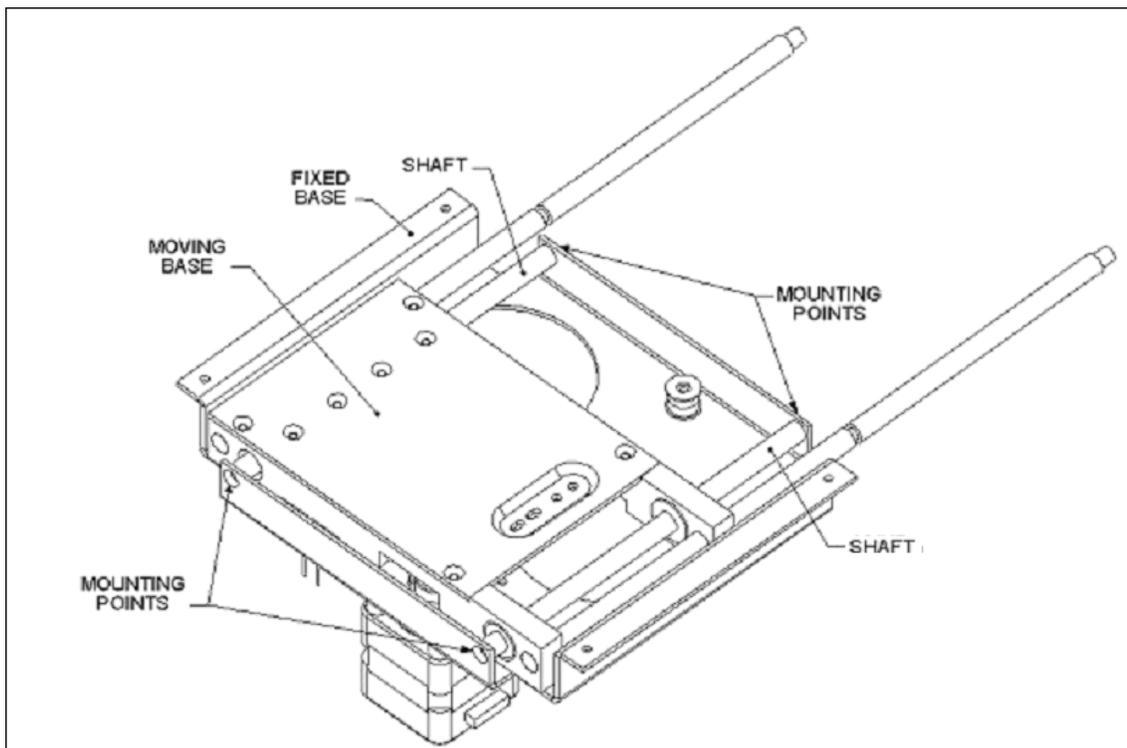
Mounting Moving Base Assembly Fixed Base Assembly
